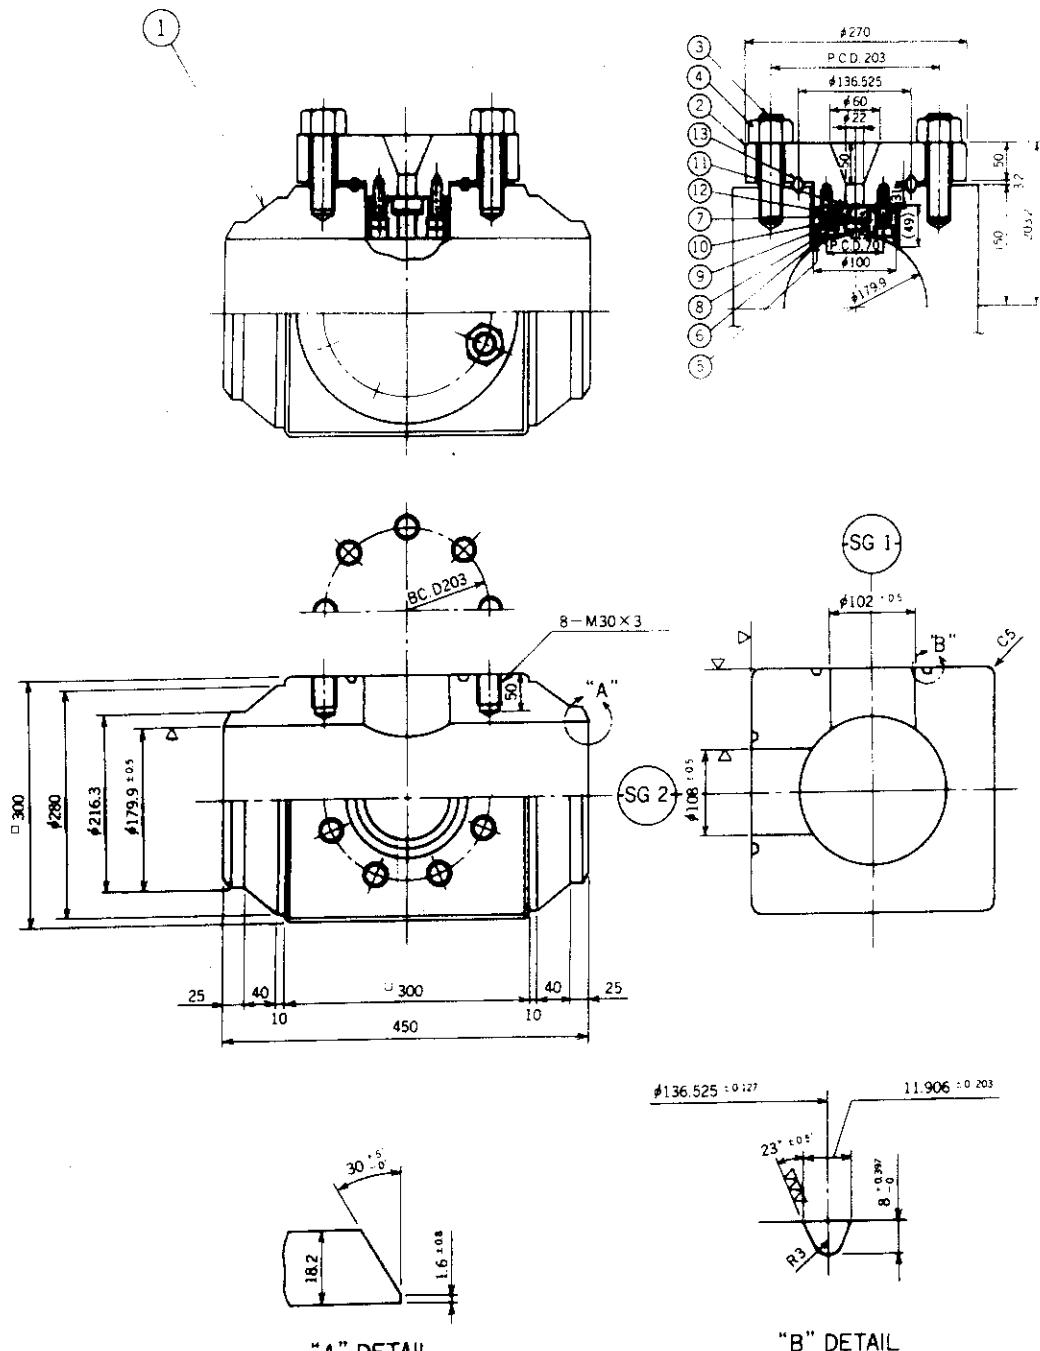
(a) Horizontal Pipe Test Section Mixer (MX-2)
